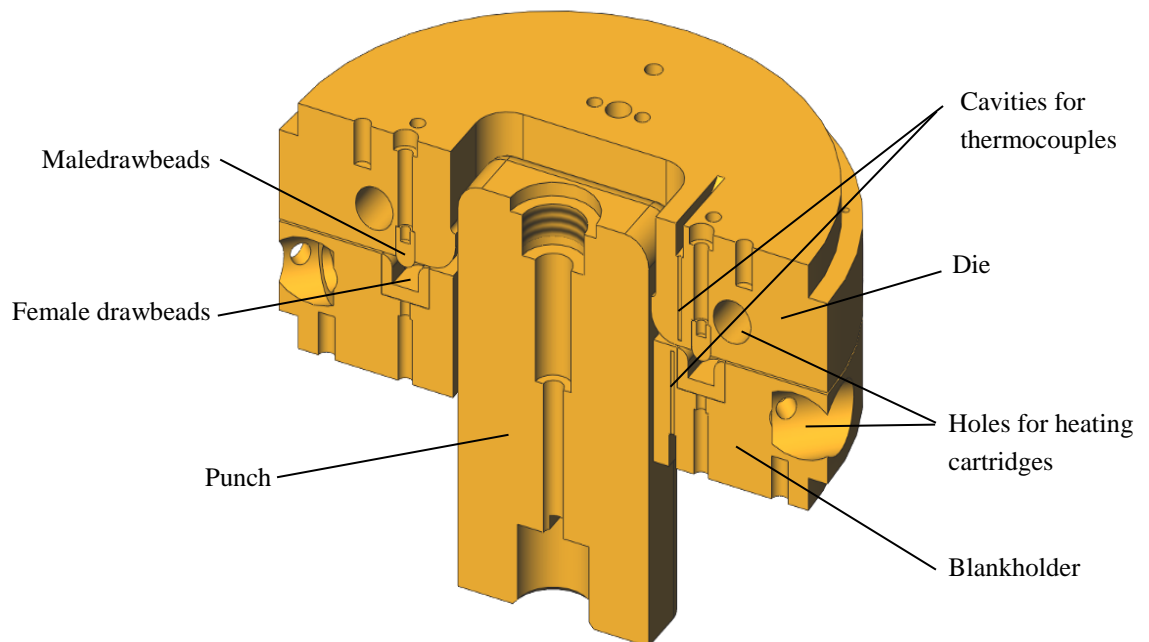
Assembly of the heated deep-drawing tool with drawbeads
